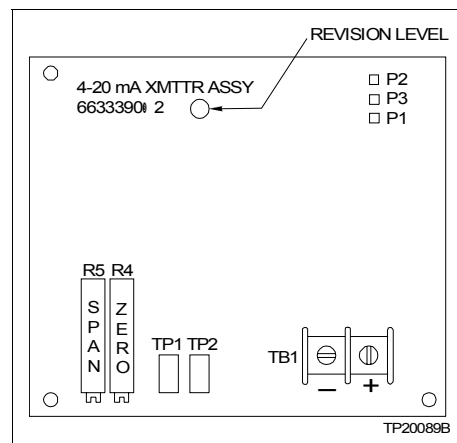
Electric Shaft Position Transmitter Circuit Board
